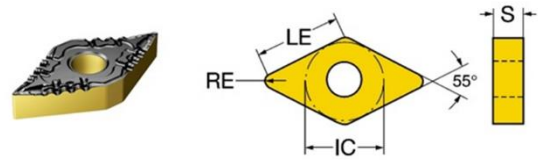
Sandvik DNMG 110408-PF 4315 cutting tool [20].
